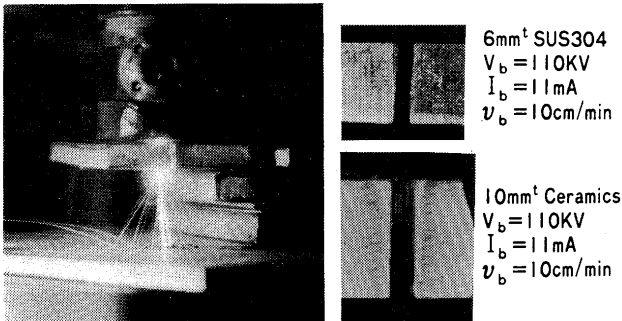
NV-EB gas cutting with two samples of the cutting cross section.
